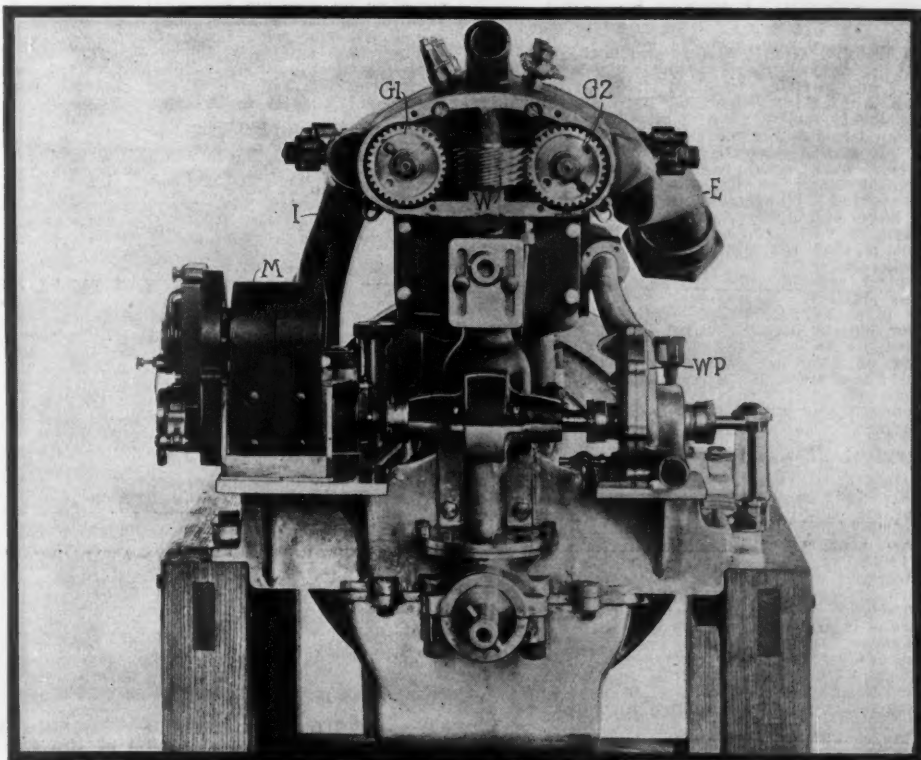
MEAD ROTARY-VALVE MOTOR: G1 AND G2, GEARS ON ENDS OF ROTARY VALVES DRIVEN BY WORM W; E, EXHAUST MANIFOLD; I, INTAKE MANIFOLD; WP, WATER PUMP; AND M, MAGNETO
